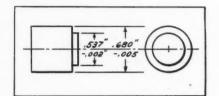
Simple Machine Part Used as Basis for Discussion of Typical Control Methods for Two Dimensions Indicated on Drawing
